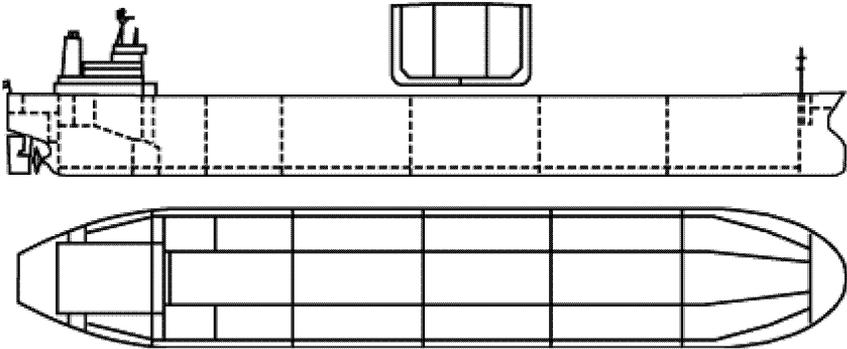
General view of a typical double hull oil tanker (150,000 DWT and greater)
